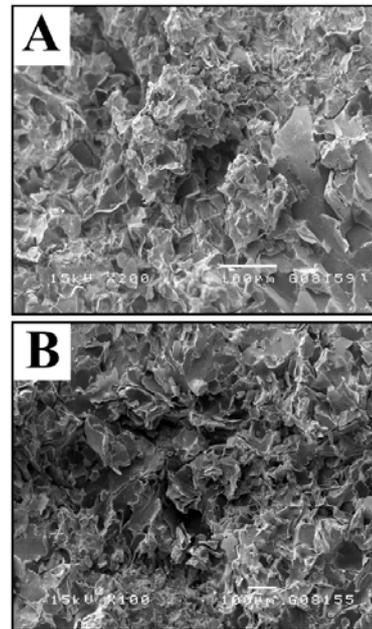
Tensile fracture surfaces of the mold wall thickness of 2.8 inch.
